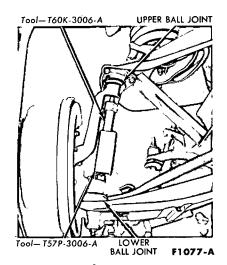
Locking Upper Ball Joint Stud in Spindle
